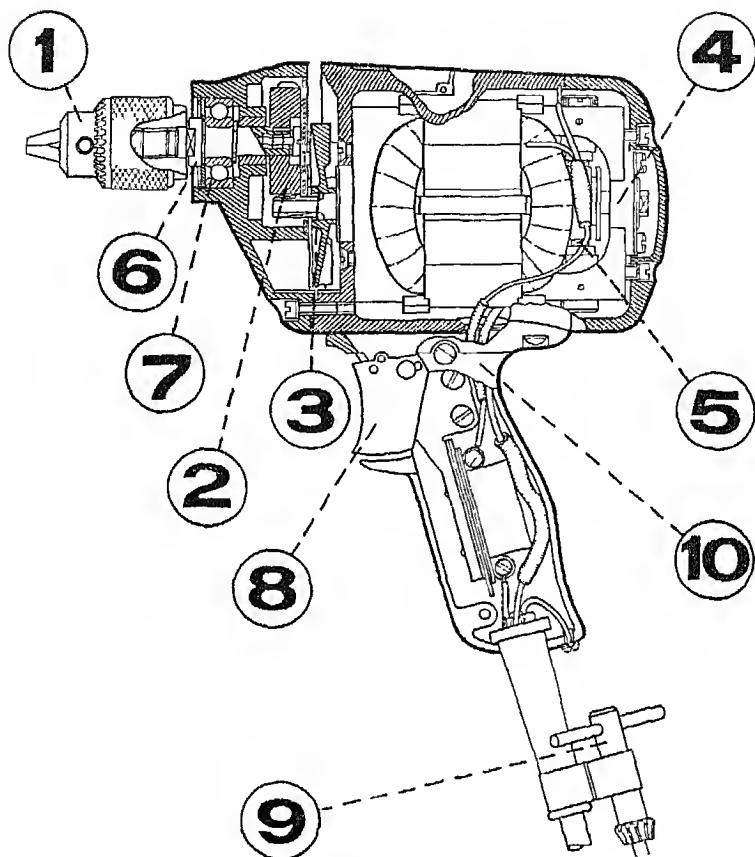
The Bridges Neonc Drill DR2T*—main parts. 1 Chuck. 2. Large gear. 3. Armature fan. 4. Motor unit. 5. Carbon brush. 6. Chuck spindle. 7. Front gear box bearing. 8. Switch trigger. 9. Chuck key. 10. Handle cover casting.
